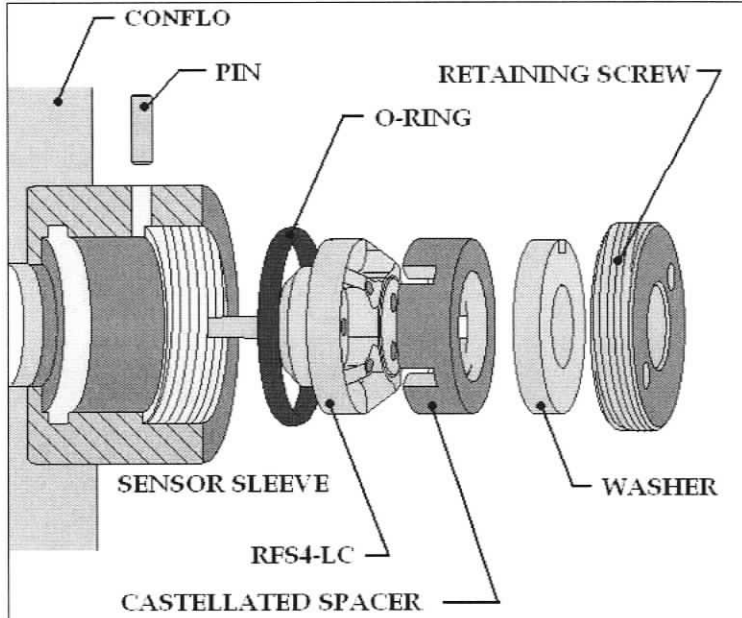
, Exploded view of RFS4-LC assembled in the sensor sleeve
